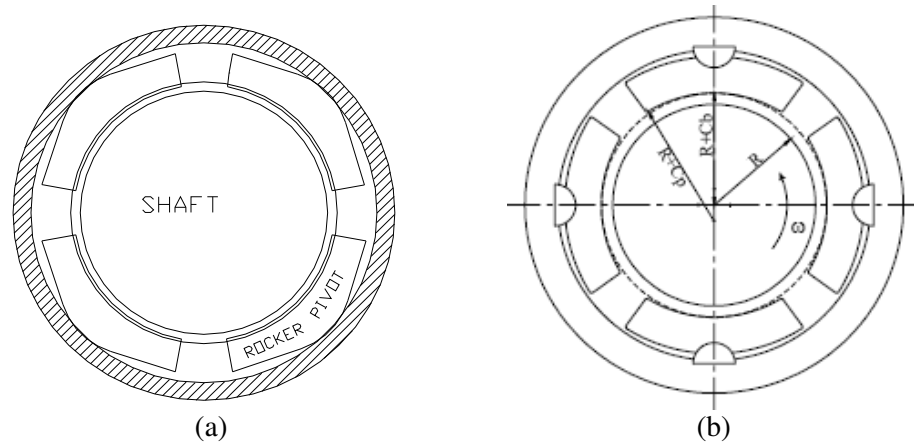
Rocker pivot (a) and spherical seat (b) type tilt pad bearing [1, 2]
